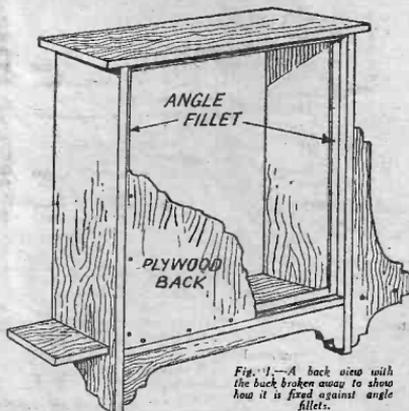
A back view with the back broken away to show how it is fixed against angle fillets.
